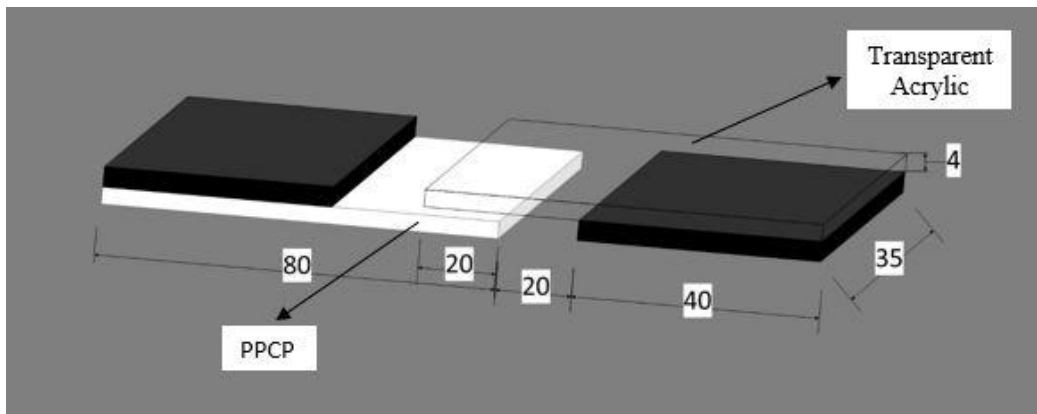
Design of weld sample to avoid bending for lap shear testing
